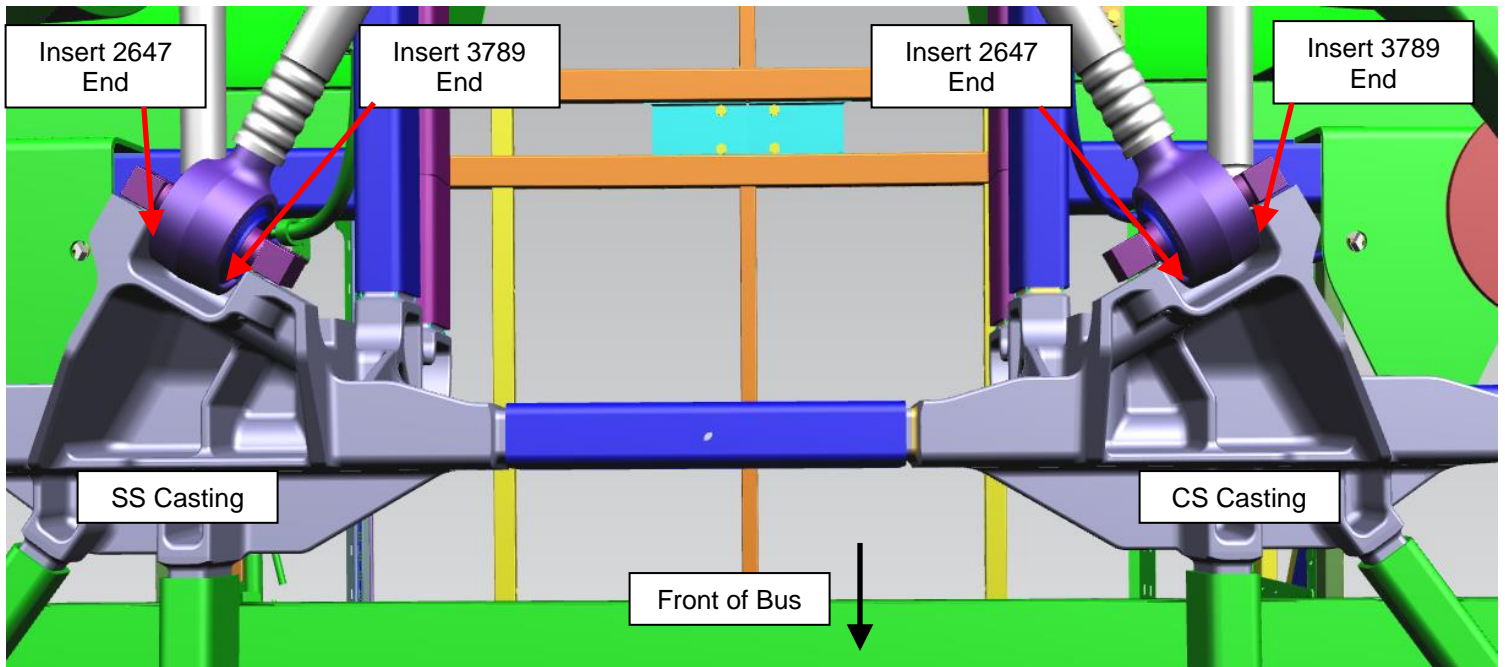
SS & CS Center Axle Radius Rod Castings (View from Under Bus)
